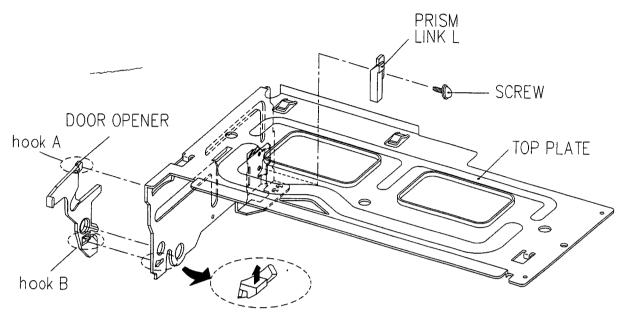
DISASSEMBLY OF THE TOP PLATE
